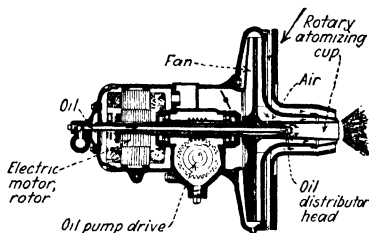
Cup-type burner with integral motor-driven fan and oil pump. (*Petroleum Heat and Power Company.*)
